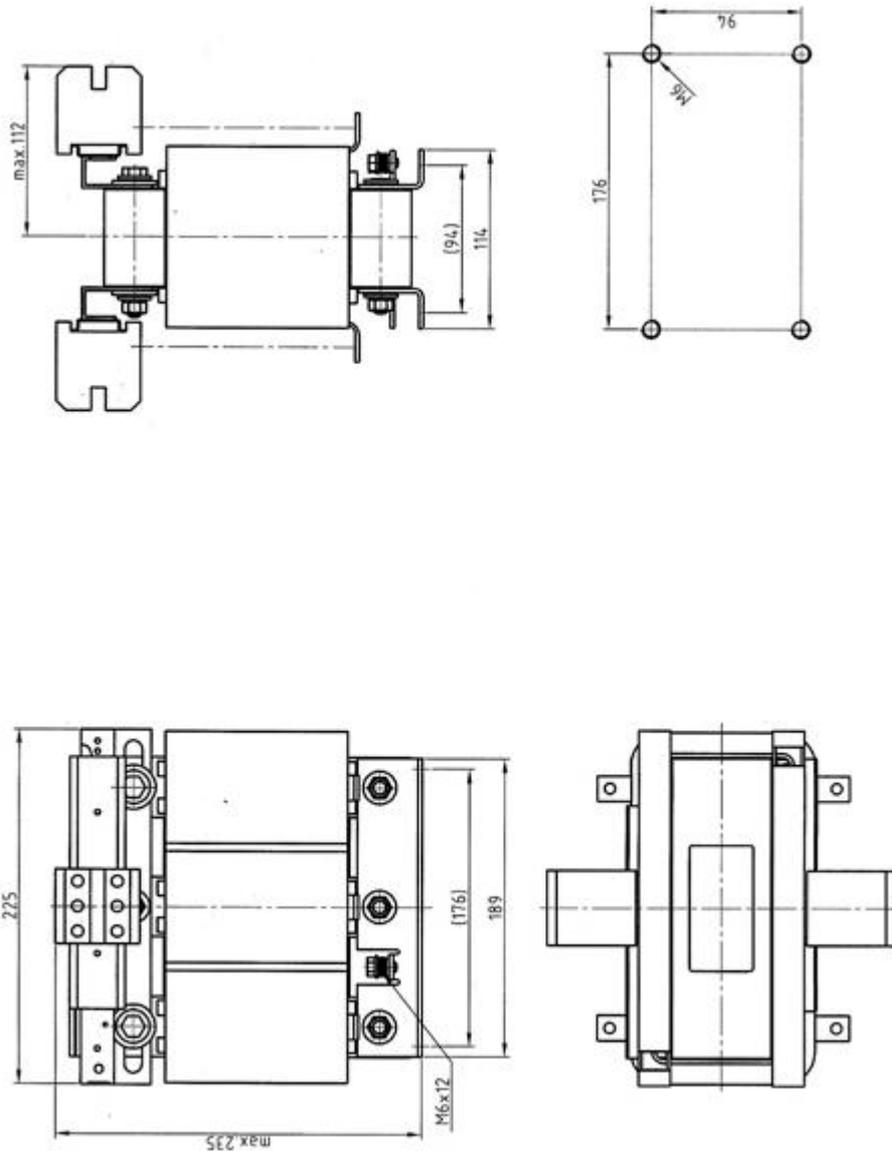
Dimension drawing of the line reactor for the Smart Line Module 36 kW
